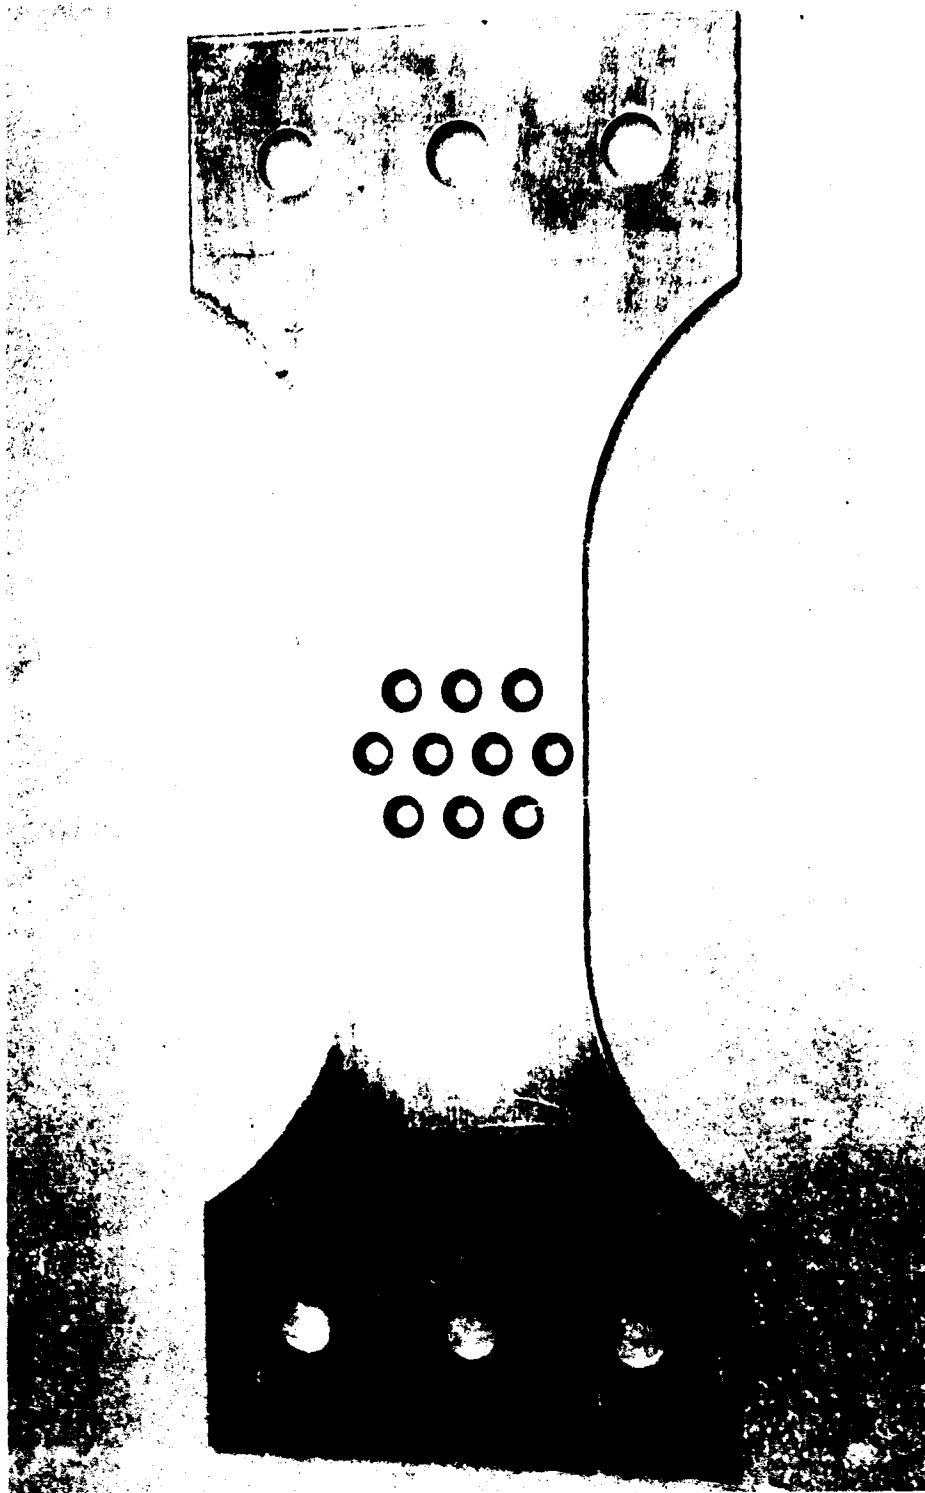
6061-T6 Specimen with Ten Hole Rivet Pattern
